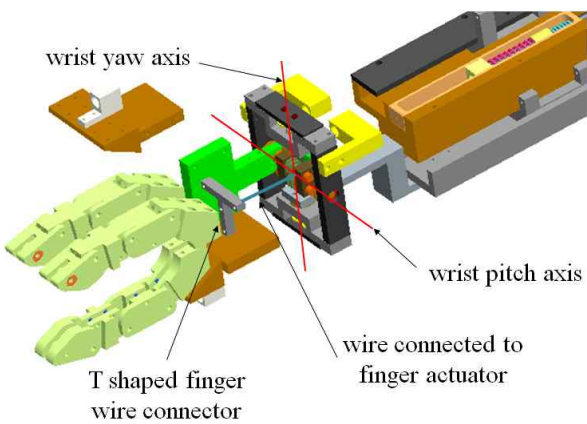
Arrangement of wrist yaw axis, wrist pitch axis and finger wire
